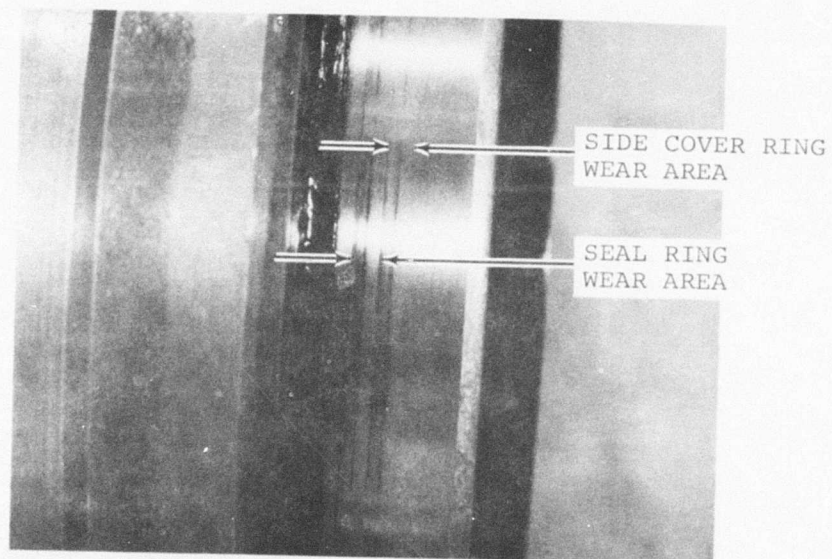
Type I Carbon Seal Wear Sleeve After 179 Hours of Flight Test.
